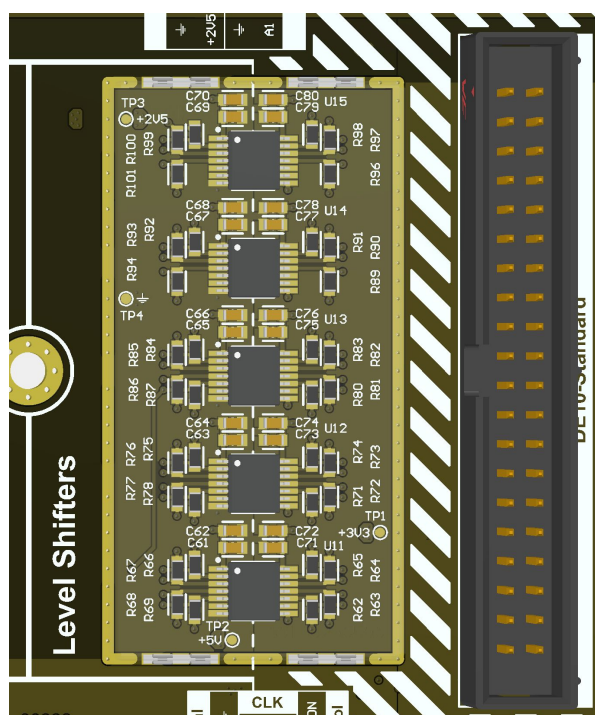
3D view of the level shifter circuit in the PCB.
